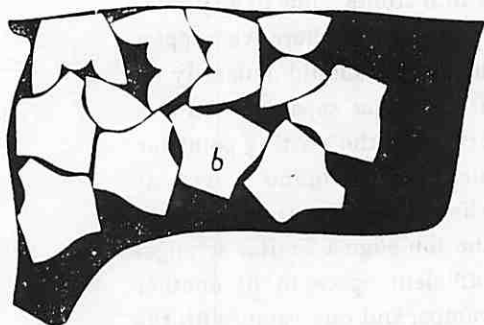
represents the cutting of a badly flawed skin; the whole of one side of the neck and one shank of the shoulder were marked with scratches. It is used as an illustration of what may have
